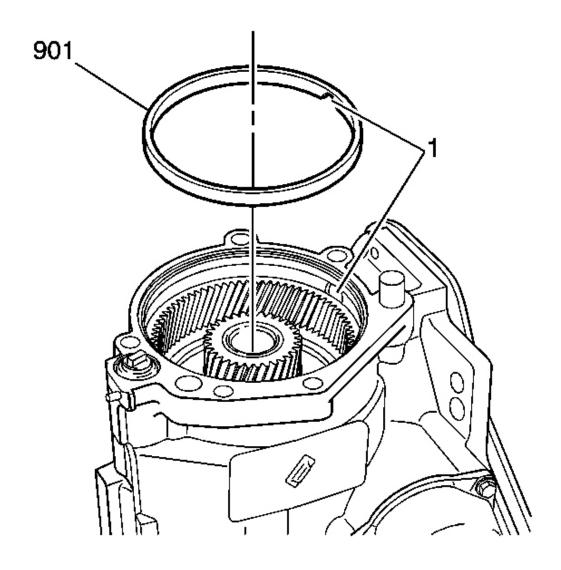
Identifying Oil Dam Courtesy of GENERAL MOTORS CORP.
